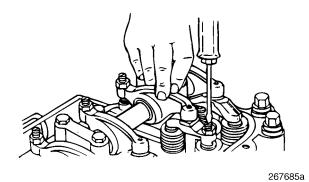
Turning Yoke Adjusting Screw Until it Contacts Valve Stem
